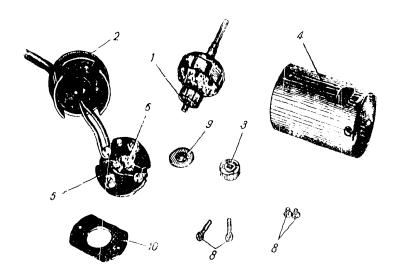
FLEC.FRIC MOTOR (4P = 3.5M (DISASSEMBLED))
